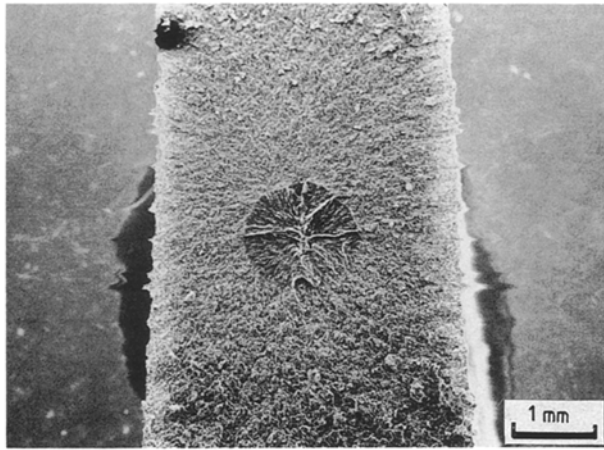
Low-magnification view of the fracture surface of a polyacetal unnotched tensile specimen showing initiation and growth of an internal circular flaw, and the rapid fracture area outside the flaw. Note the fracture is generally square; CHS = 50 mm min⁻¹.
